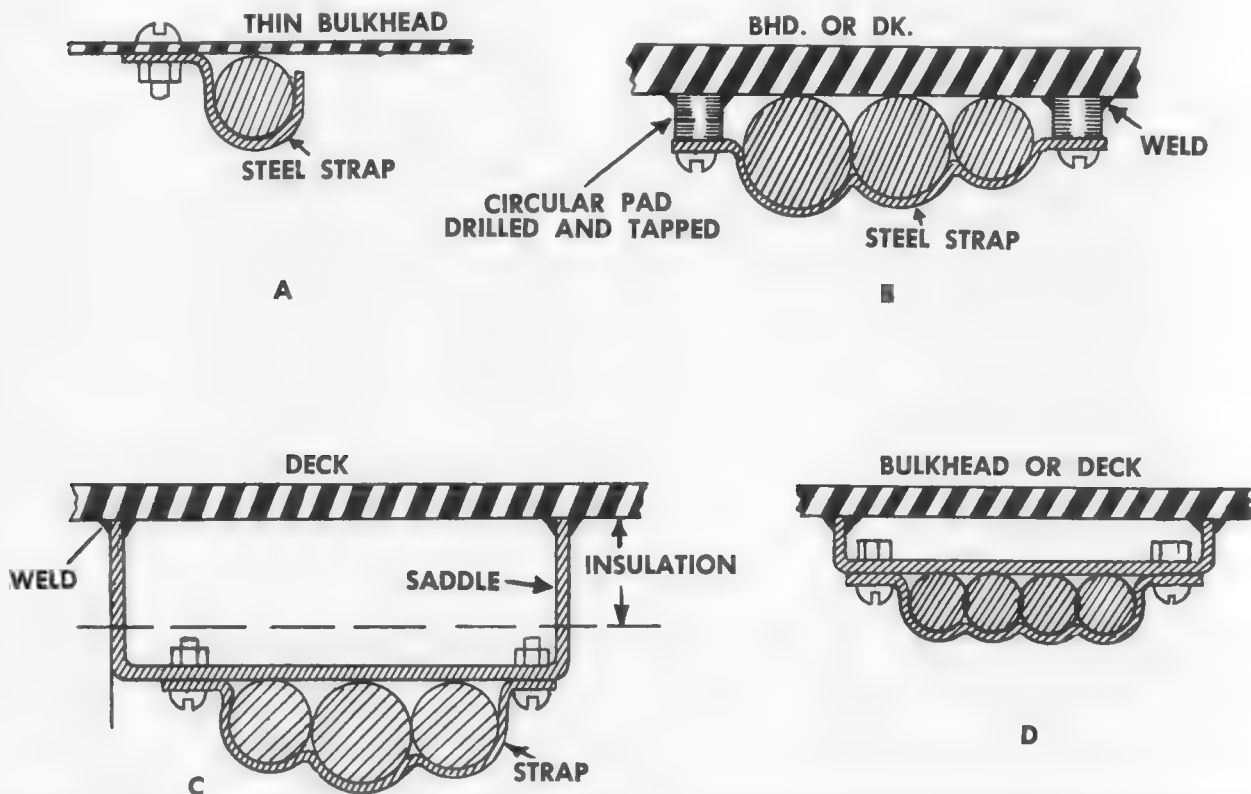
Typical methods of supporting small cable installations—(A) Single cable on thin bulkhead; (B) Three cables with welded pads; (C) Three cables with saddle (insulated deck); (D) Hanger installation on decks and bulkheads subject to dampness.
